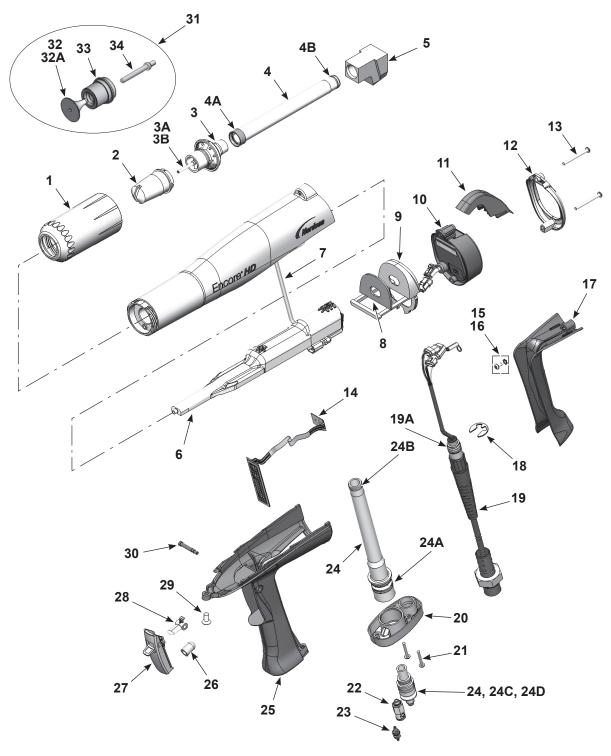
Encore HD Manual Spray Gun and Accessories Parts
